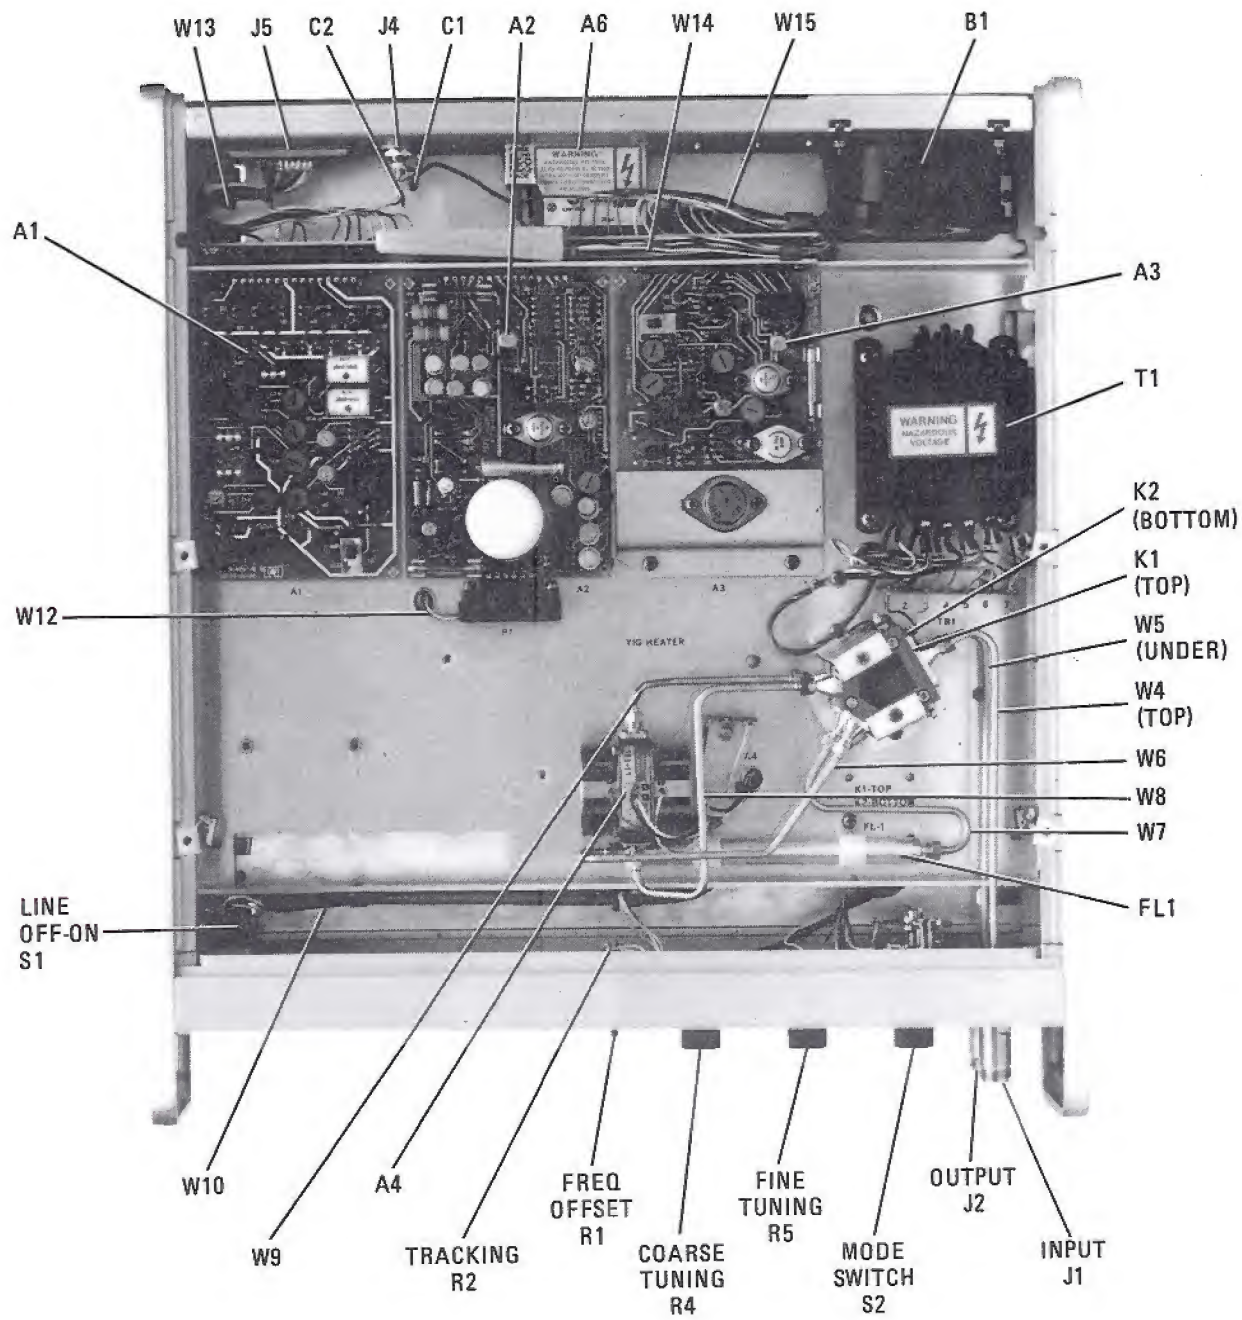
Assembly Locations in Standard and Option 002 Preselectors
